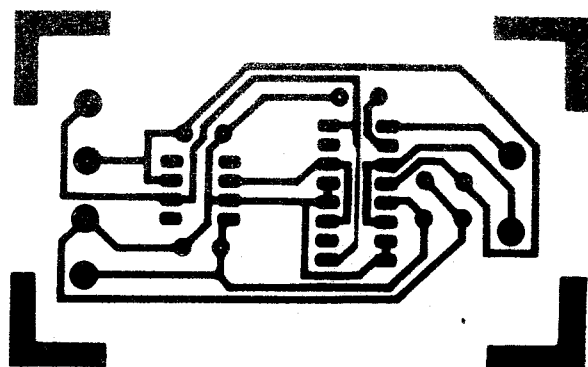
PCB MASK FOR THE INTEGRATED CIRCUIT
